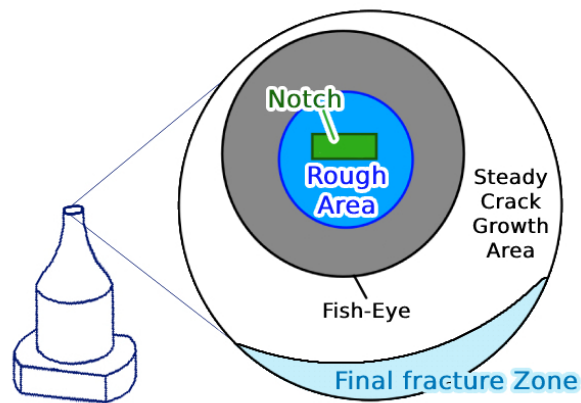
| Scheme of the typical zones on the fracture surface of an internal crack
